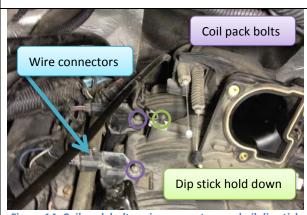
Coil pack bolts, wire connectors and oil dip stick nut.
